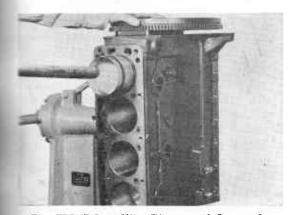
Installing Piston and Connecting Rod Assembly
